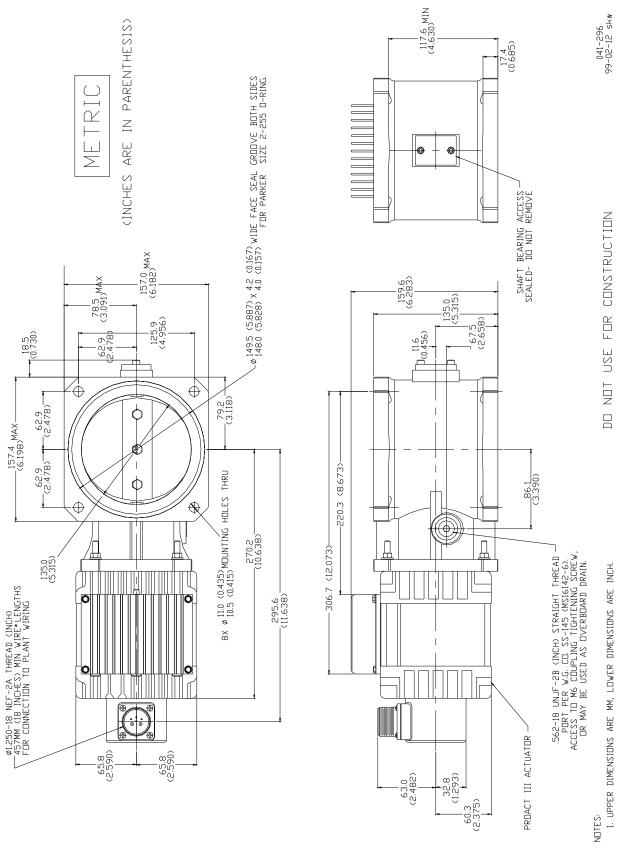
Outline Drawing of Flo-Tech 135 with ProAct III Actuator
